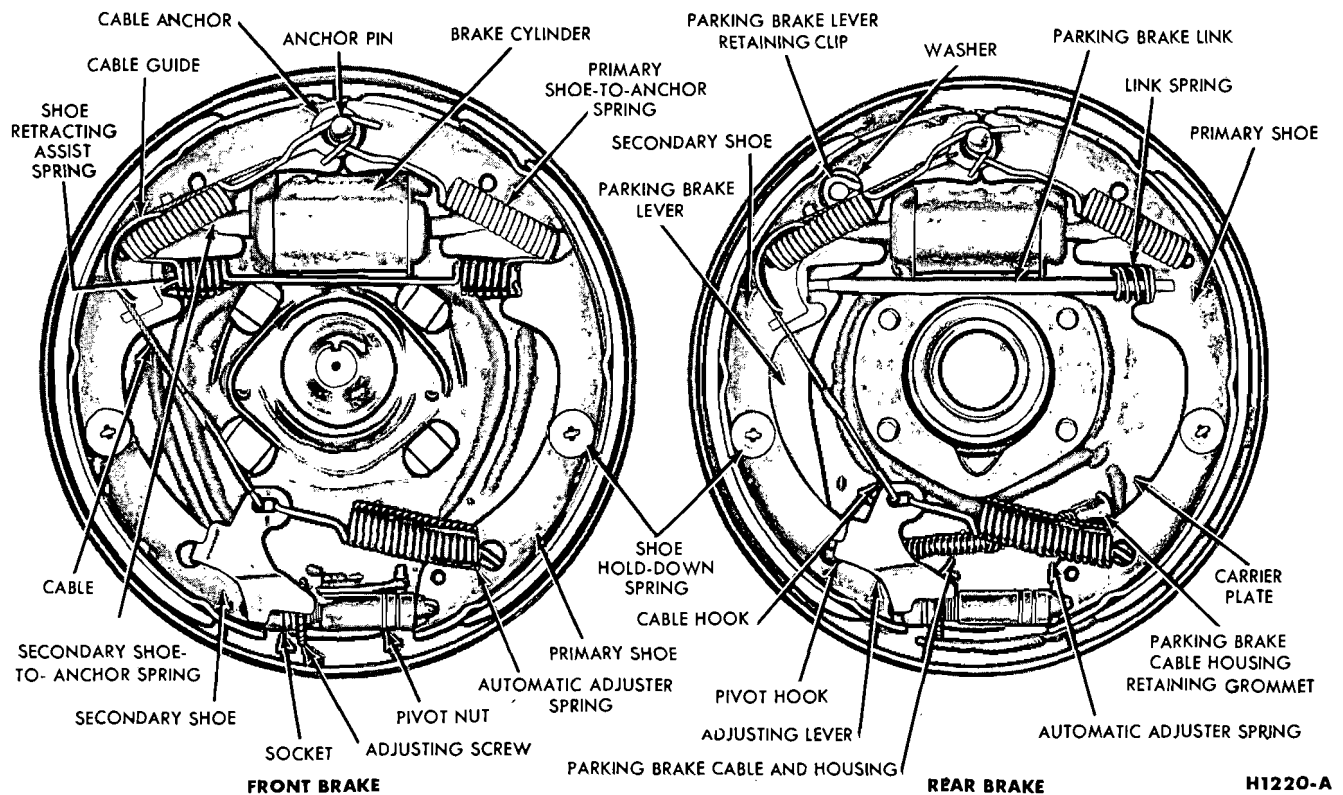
Self Adjusting Brake Assemblies—10 Inch Drum
